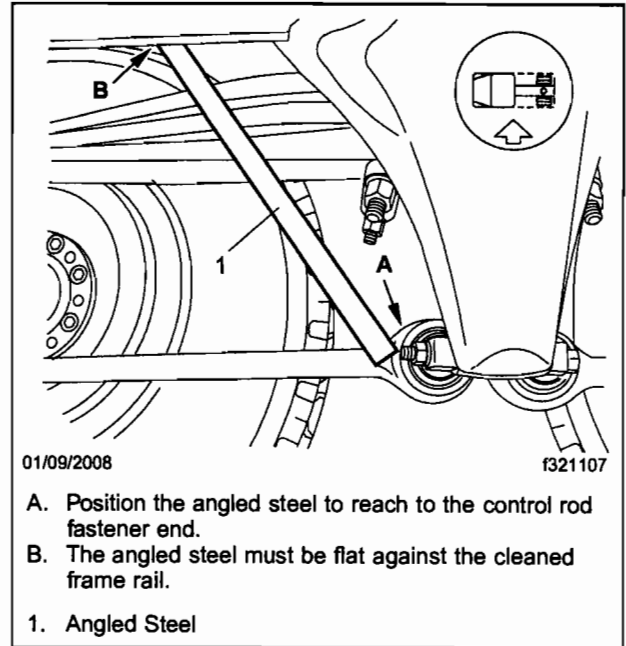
, Angled Steel Positioned for Frame Bracket Inspection
